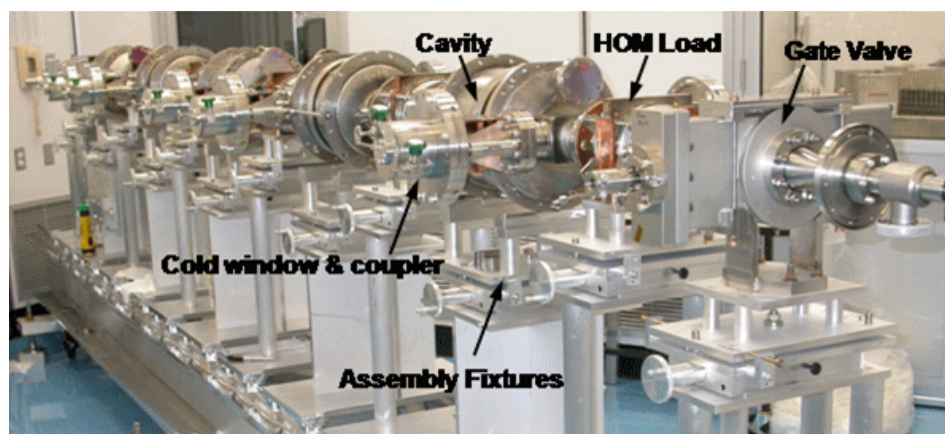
Assembled ERL injector prototype beamline string in the clean room.
